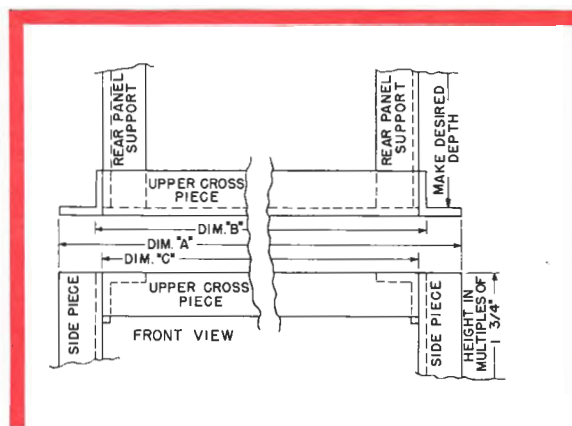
SKETCH showing assembly of angles for sides, top and bottom, and rear panel supports. Table below gives dimensions.
